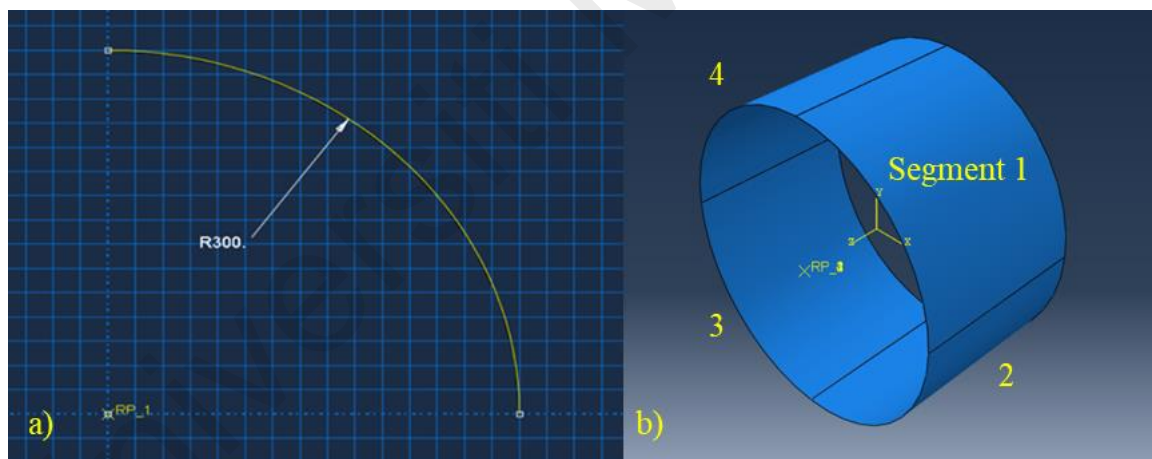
Uncoiler design (a) 2D dimensions (b) 3D model view
